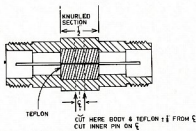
UG29B/U Type N Connector showing the position of cuts to make two end adaptors.
